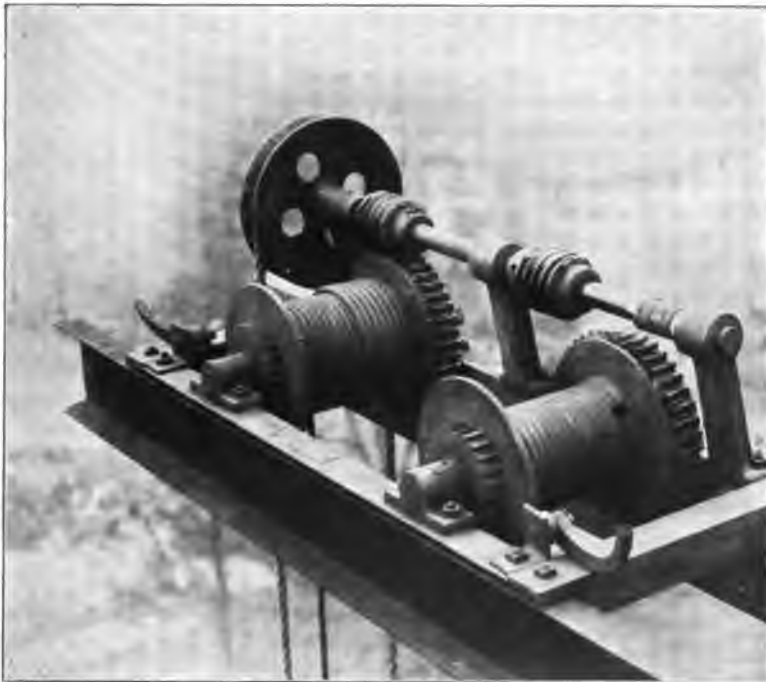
ILLUSTRATING THE IMPROPER HANDLING OF AN OVER-HEAD MACHINE.
